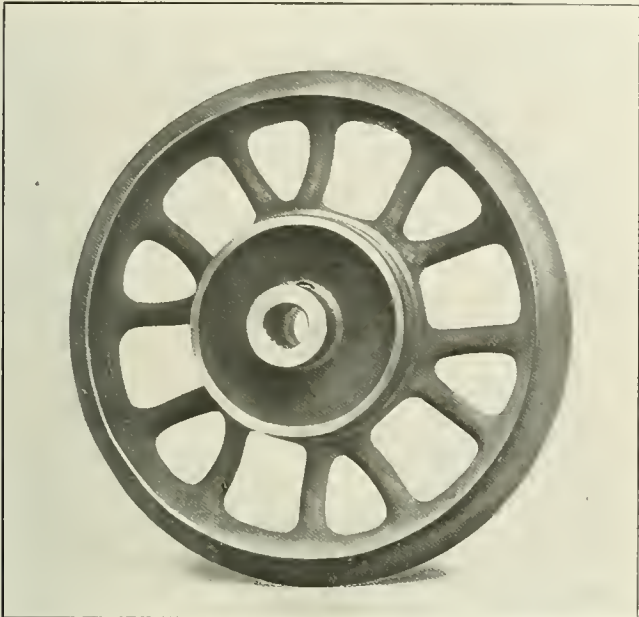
Sewing Machine Handwheel Turned in Cleveland Chucking Machine
